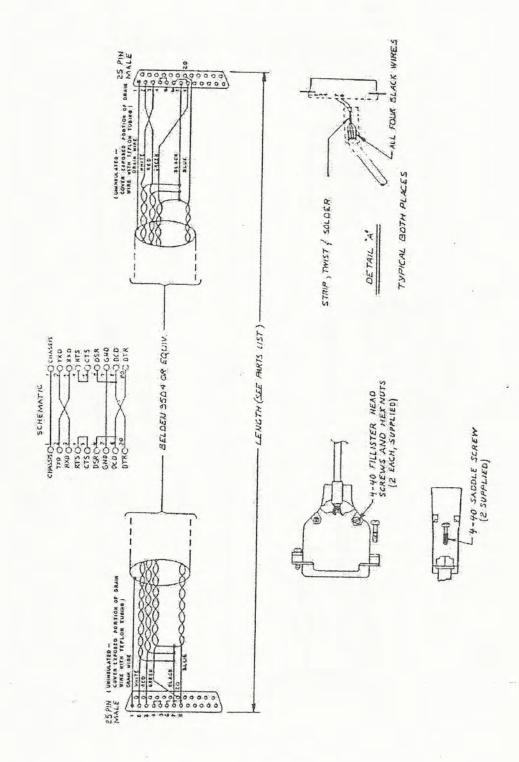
25M-25F Null Modem Cable Assembly 24C1081 Rev E
